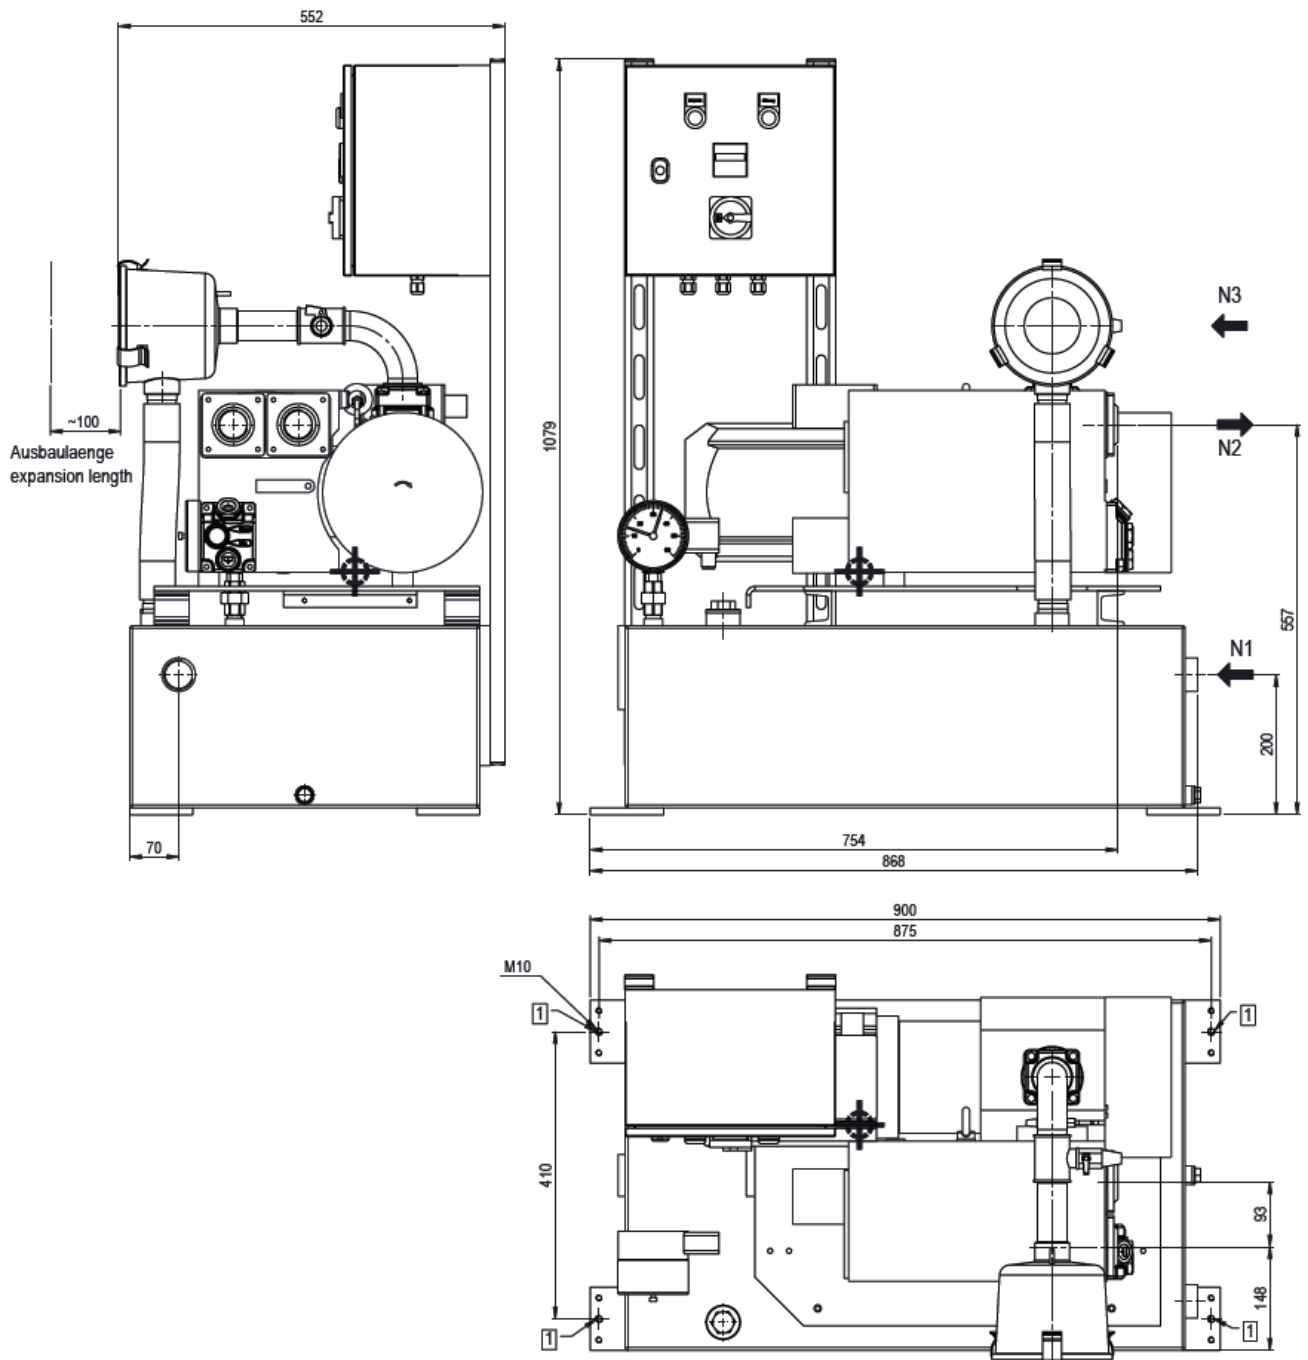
Dimensions vacuum system VD 0100 G AAA TDXX
